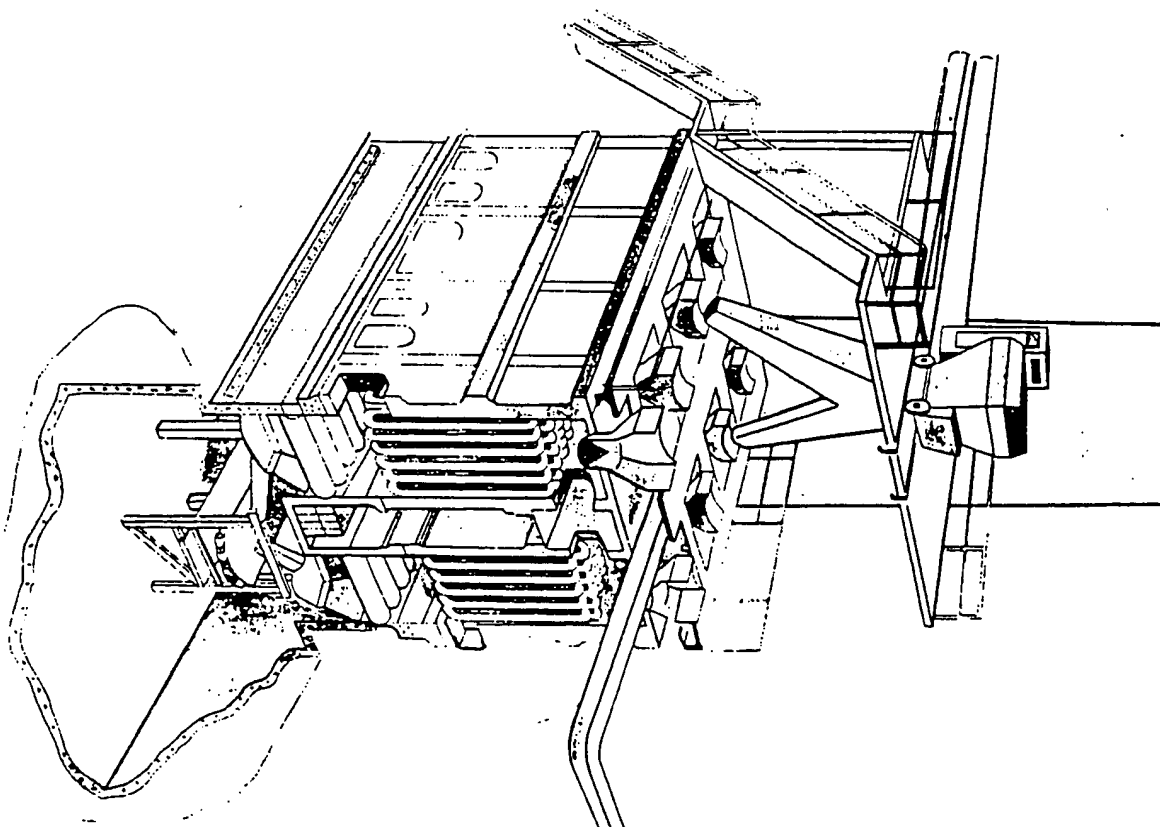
Part Section of a Block of Coke Burning Furnaces, showing charging and discharging arrangements, steam generating tubes, etc.
